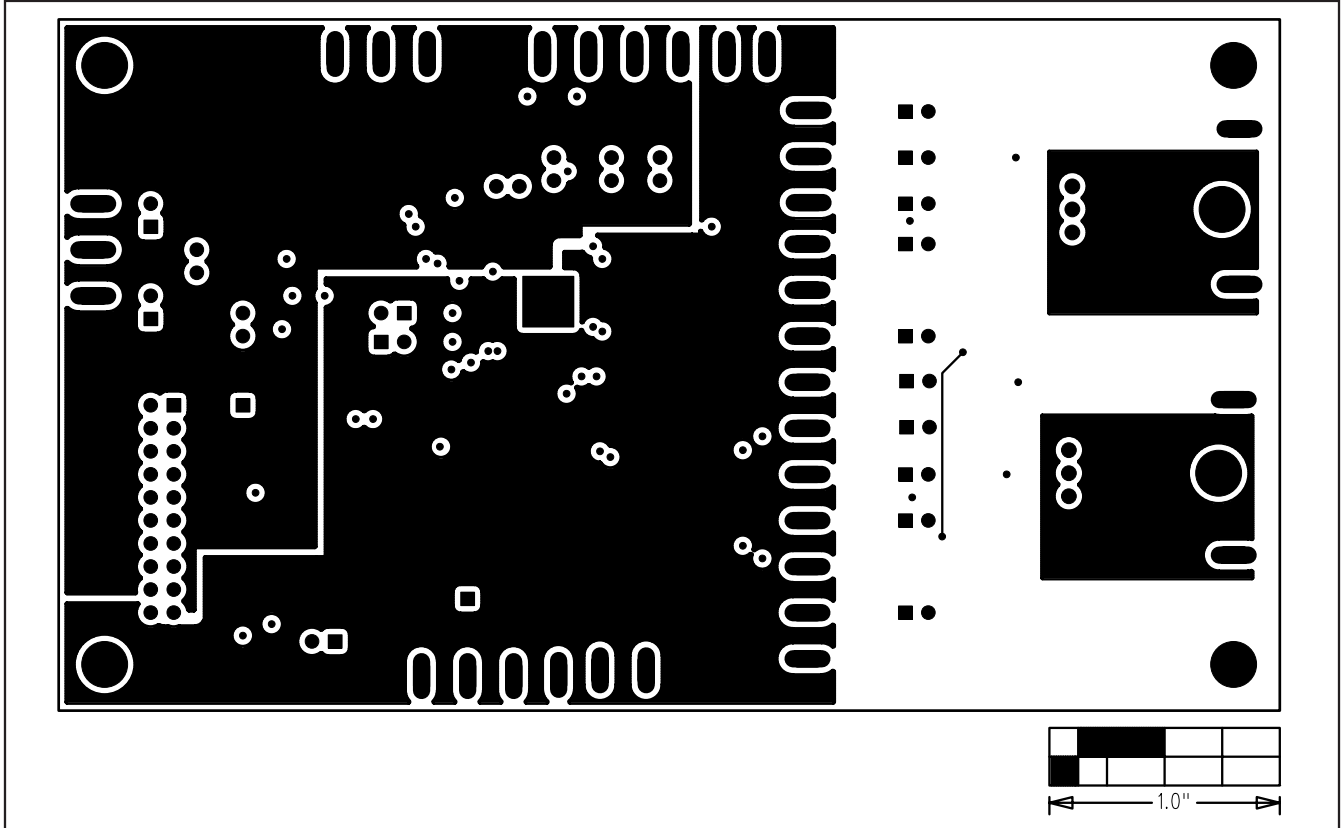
MAX1385 EV Kit PCB Layout—VCC Layer 3
